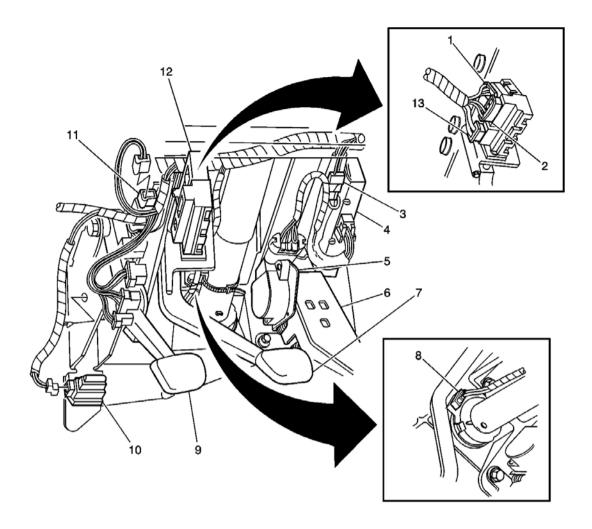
Under Side of the Dash Component View - Left Courtesy of GENERAL MOTORS CORP.
